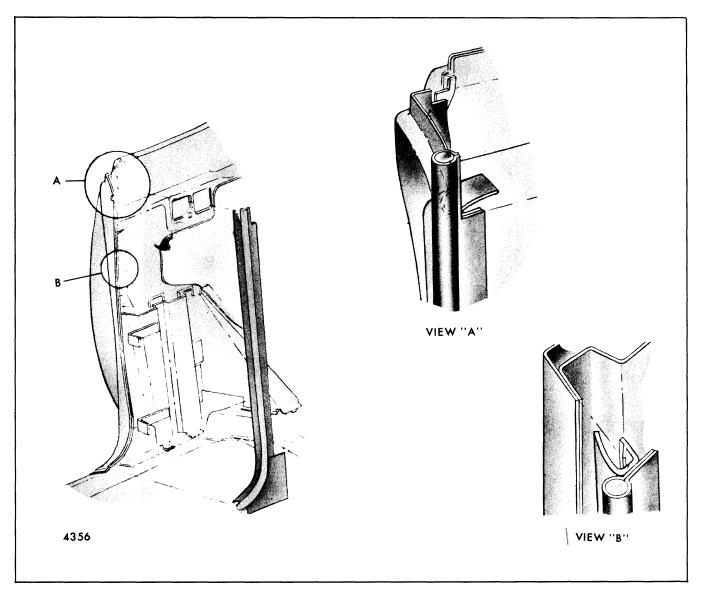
Body Lock Pillar Windlace - "B and C" Styles
